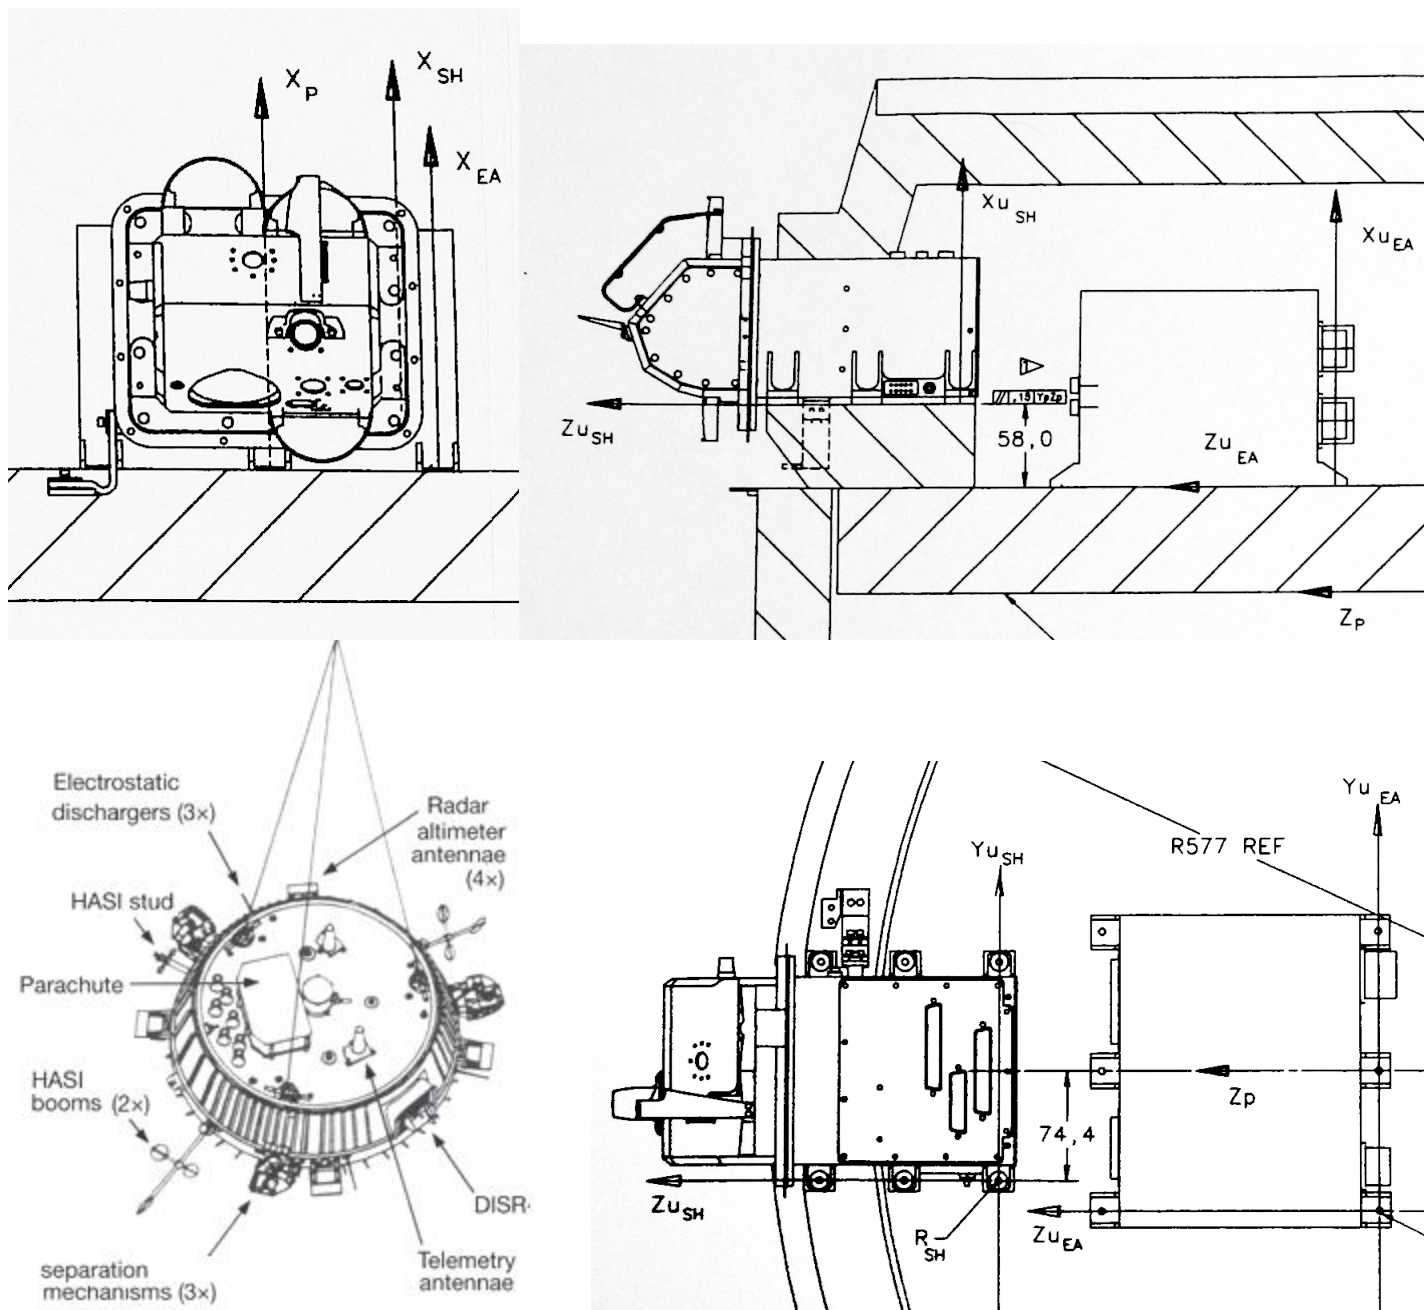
Location of the DISR Sensor Head (SH) and Electronics Assembly (EA) in Huygens probe.
